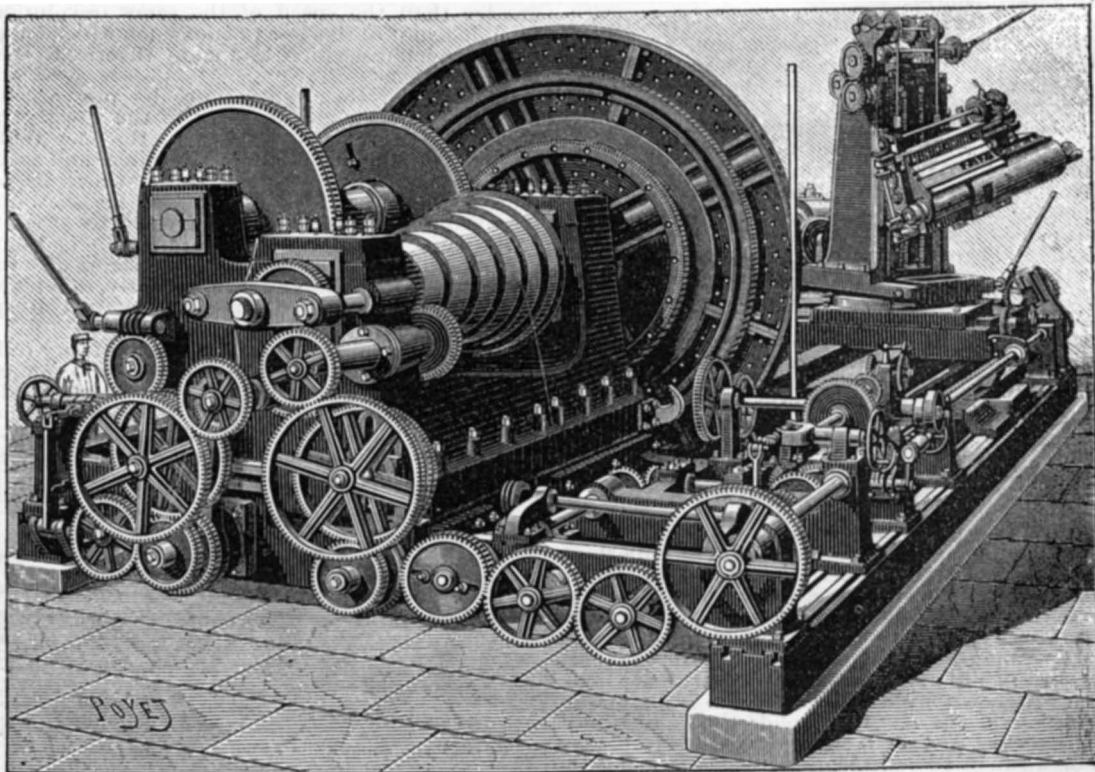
THE GREAT MULHOUSE UNIVERSAL LATHE.
